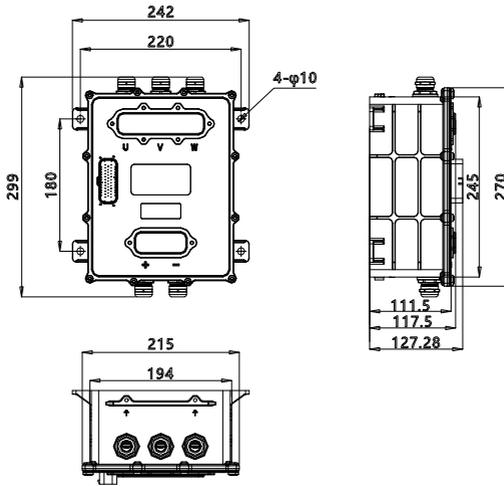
Outline, mounting dimensions of L640 (natural cooling)
